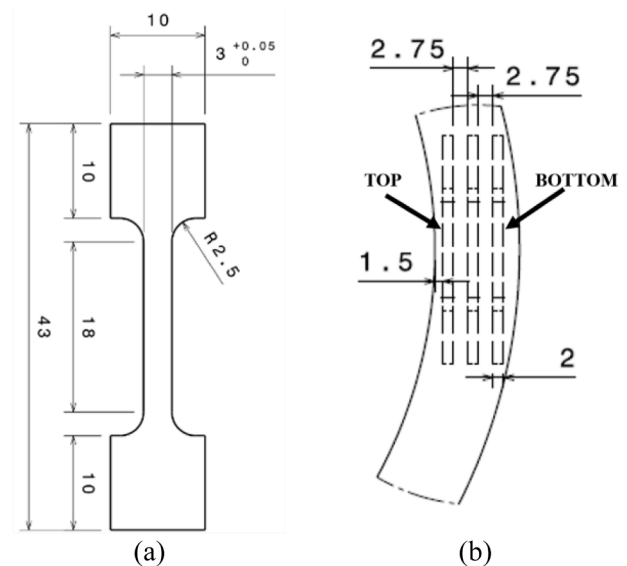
(a) Miniaturised tensile specimen and (b) extraction scheme from the welded pipe (dimensions in mm).
